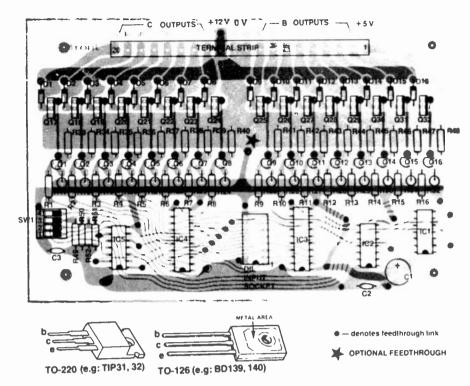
Component overlay for the driver board, and lead details for some suitable output transistors.
